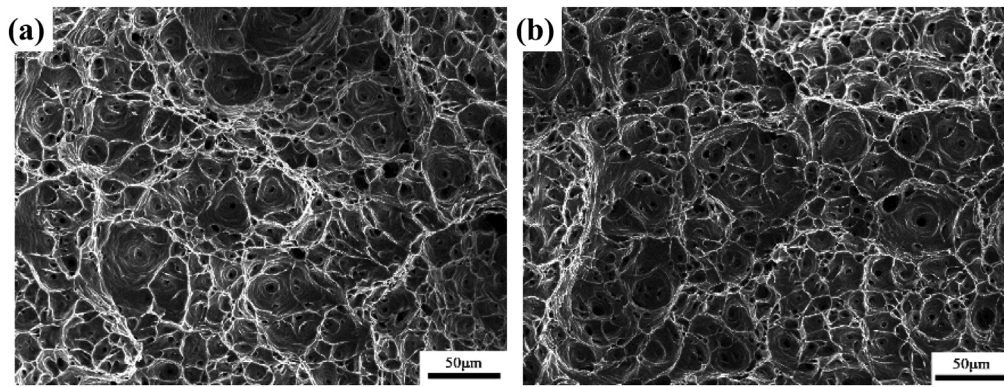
Fracture surfaces for (a) as-received (b) RS processed Al 1070.
